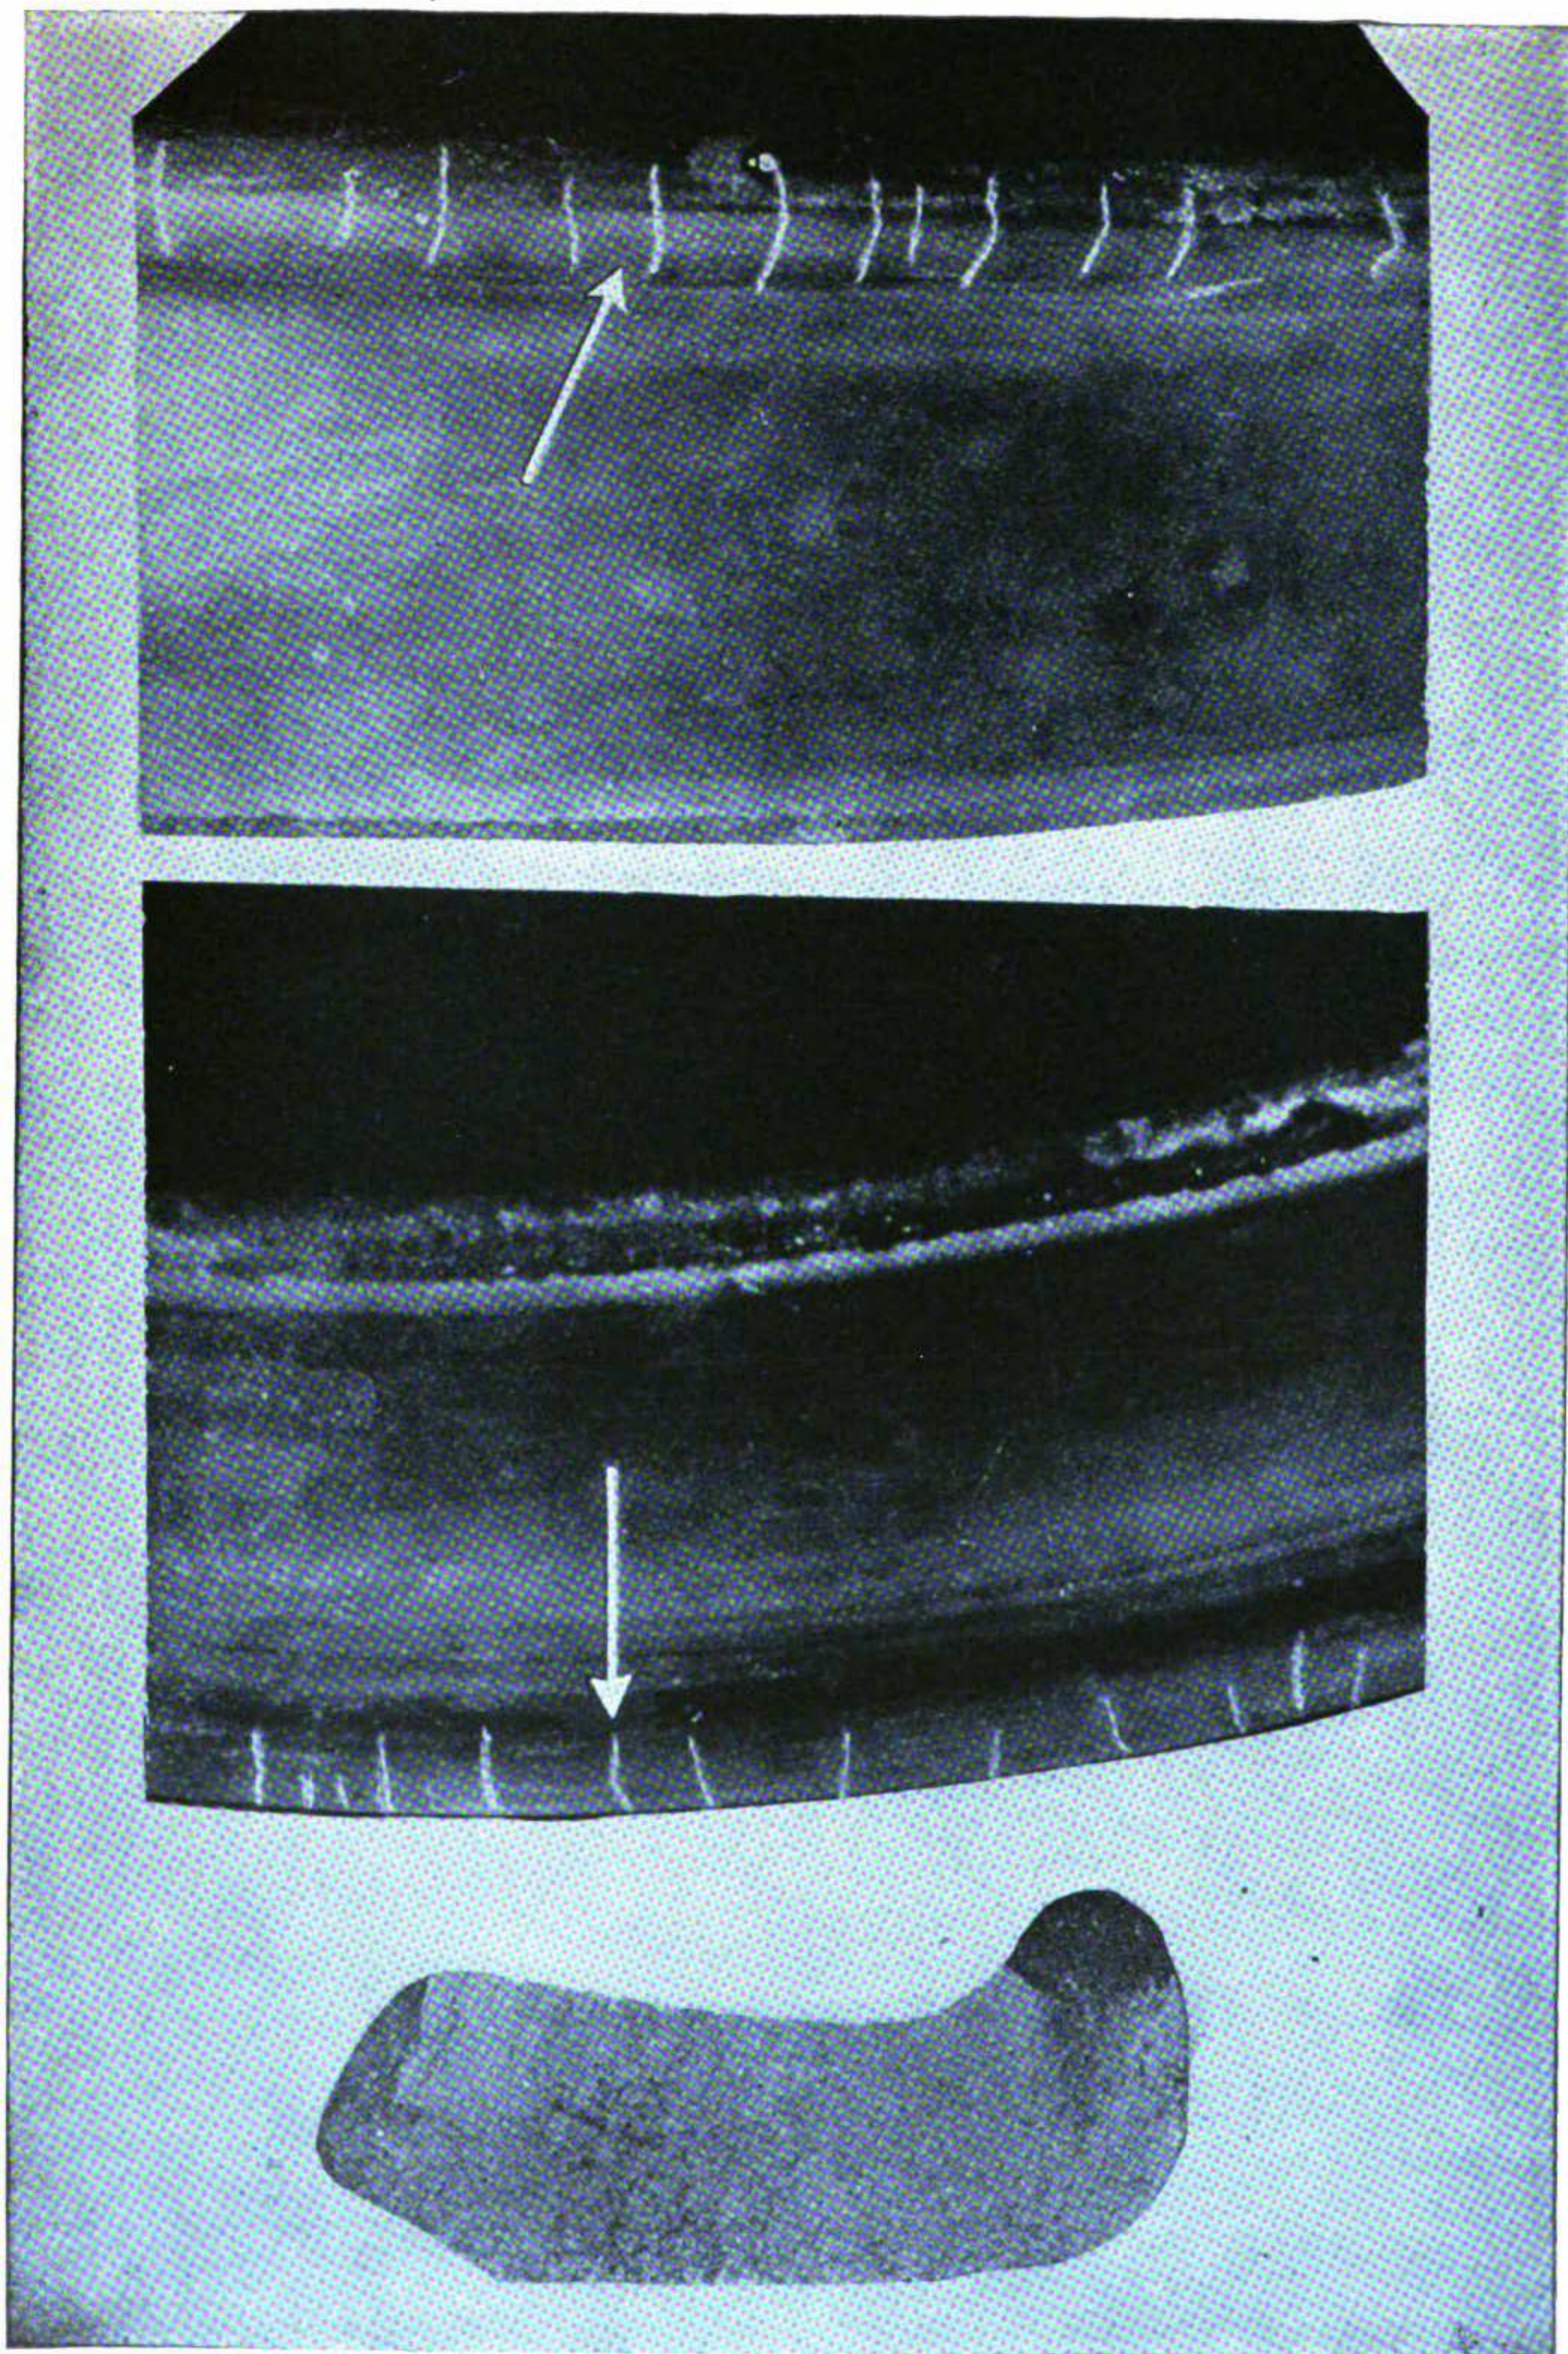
Brake burn cracks in flange, cast-iron wheel. Condemnable.
